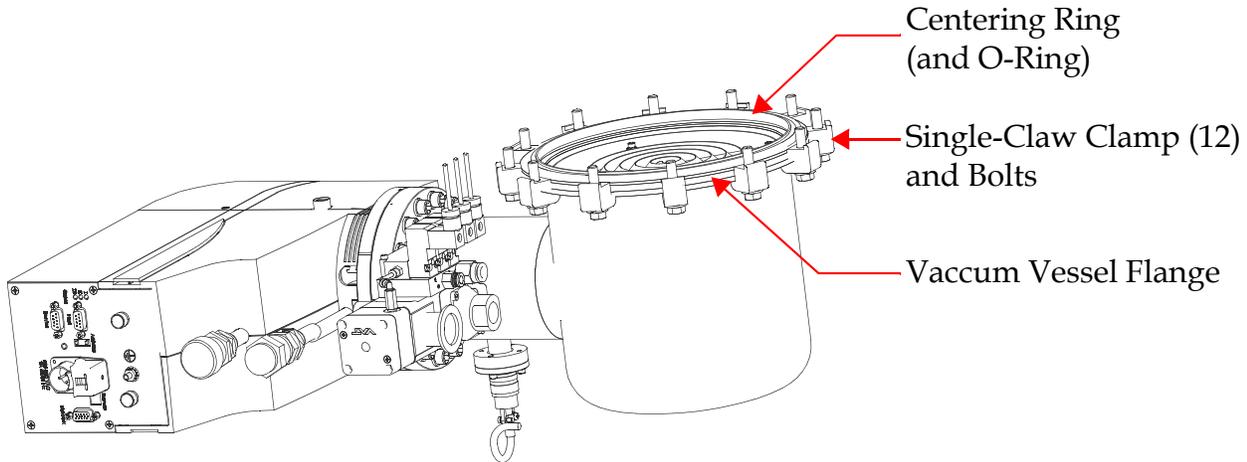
Single-Claw Clamps for Cryopump Attachment
